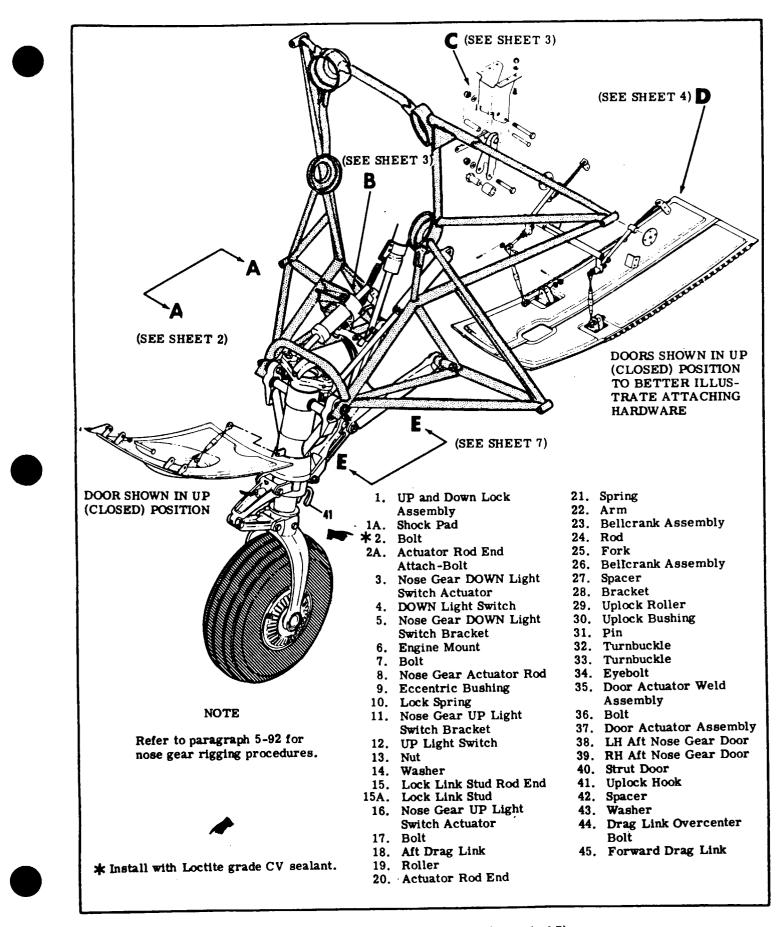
Nose Gear Rigging (Sheet 1 of 7)
